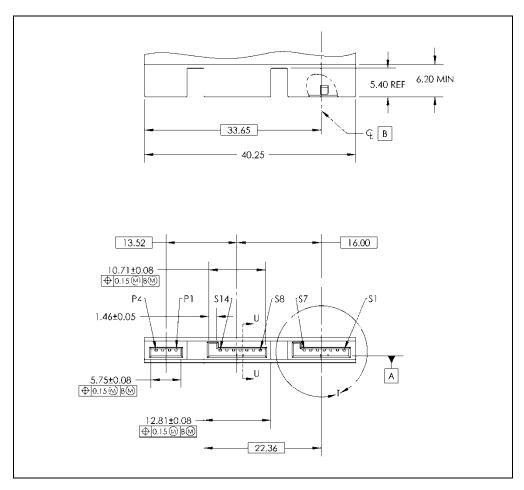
SATA Express host cable receptacle connector drawing (part 1 of 2)
